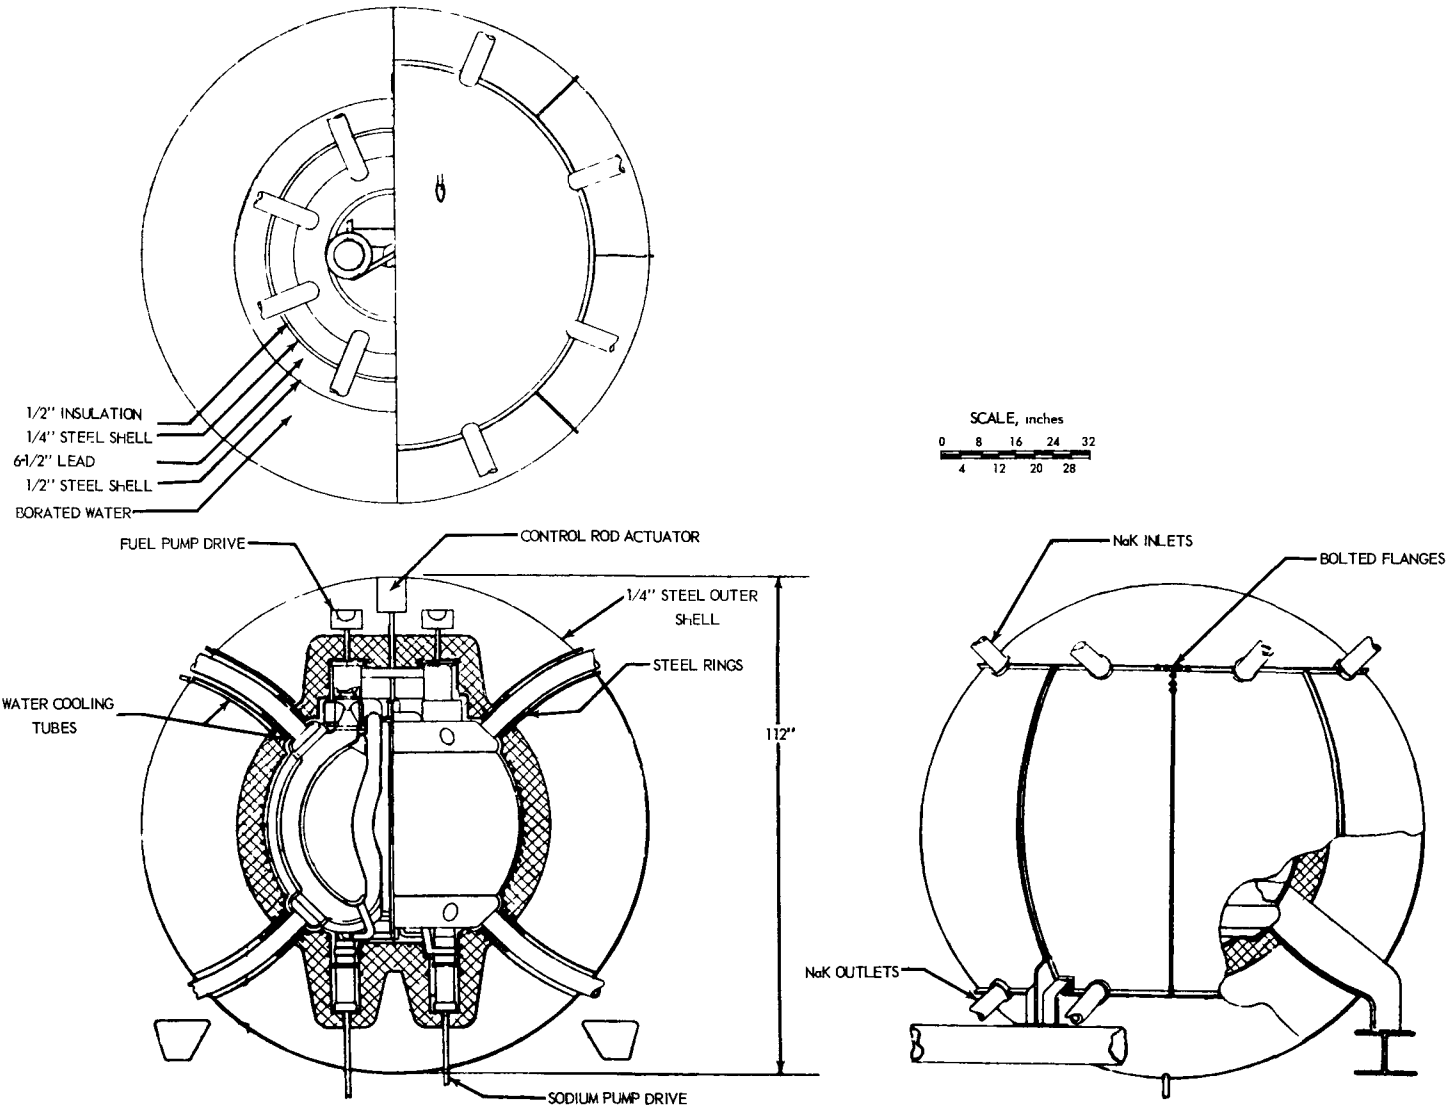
Reactor shield assembly, LF-2 power plant
